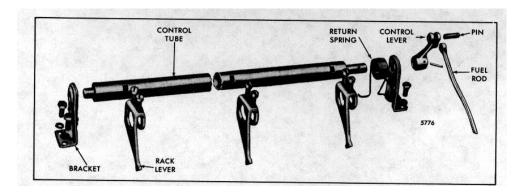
Injector Control Tube Assembly (Non-Spring Loaded)
